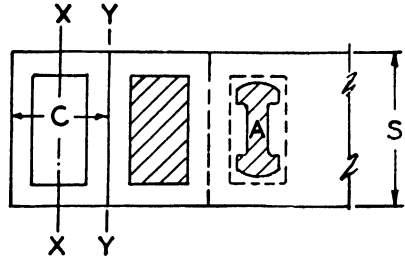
The most economical layout for the part shown in Fig. 1. It includes blanking an additional piece at A.
